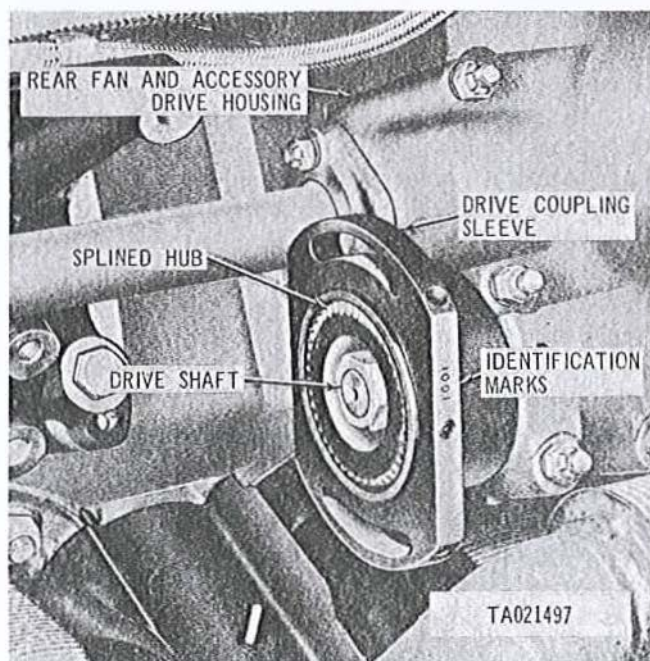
Correct position of fuel injection pump drive coupling on hub before pump installation.
